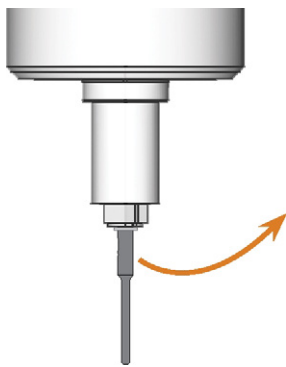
REMOVING THE TOOL FROM THE COLLET CHUCK
